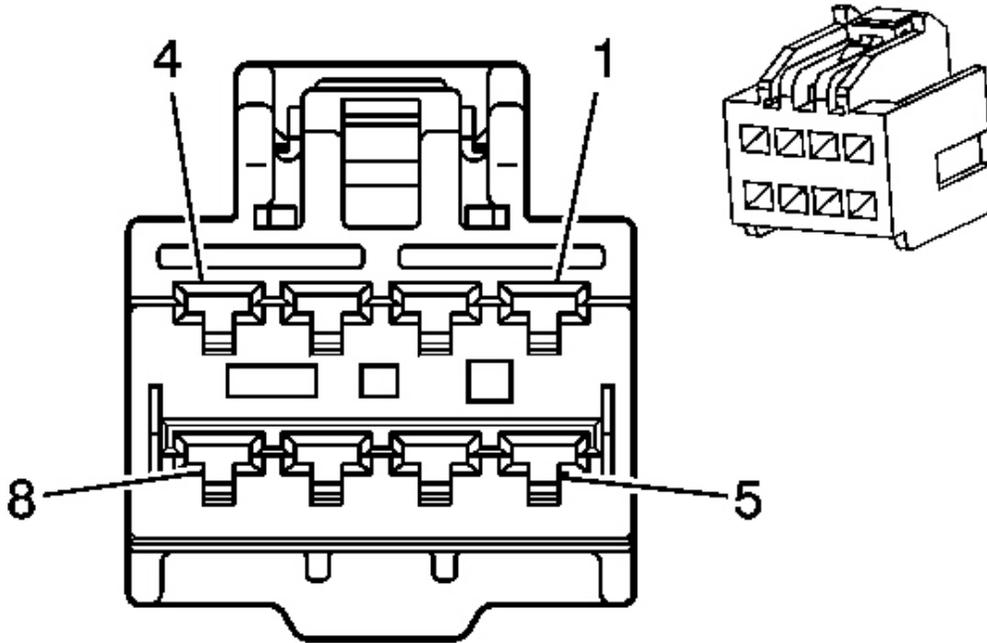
Heated Seat Control Module - Driver X2 Connector End View
